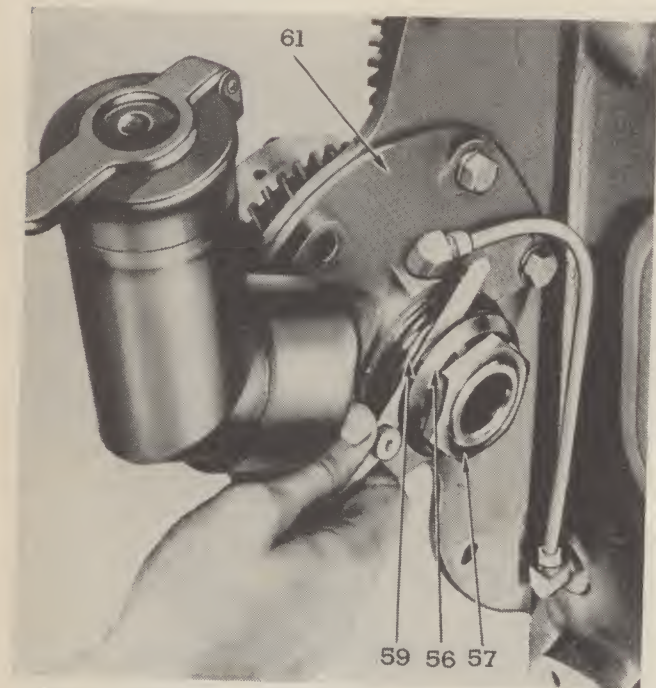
A—Checking end clearance of GM engine blower drive gear hub assembly by inserting feeler gage between thrust washer (56) and flange of bushing (59). Recommended clearance is 0.005-0.010.
